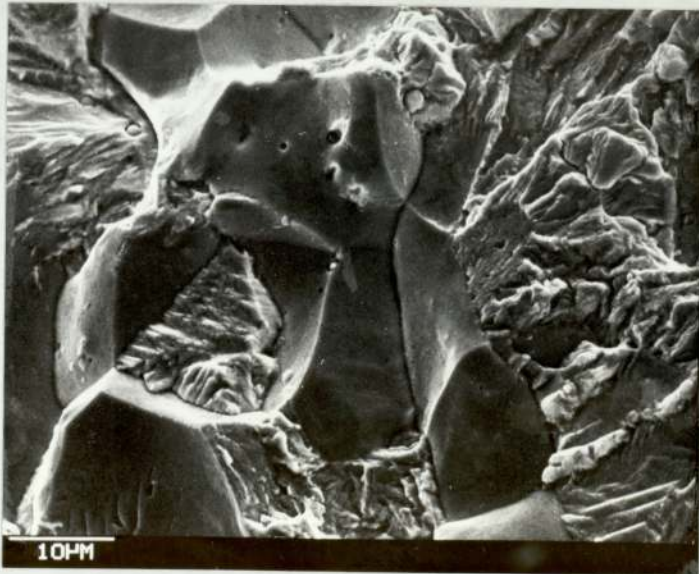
Fatigue fracture in nitrocarburised
